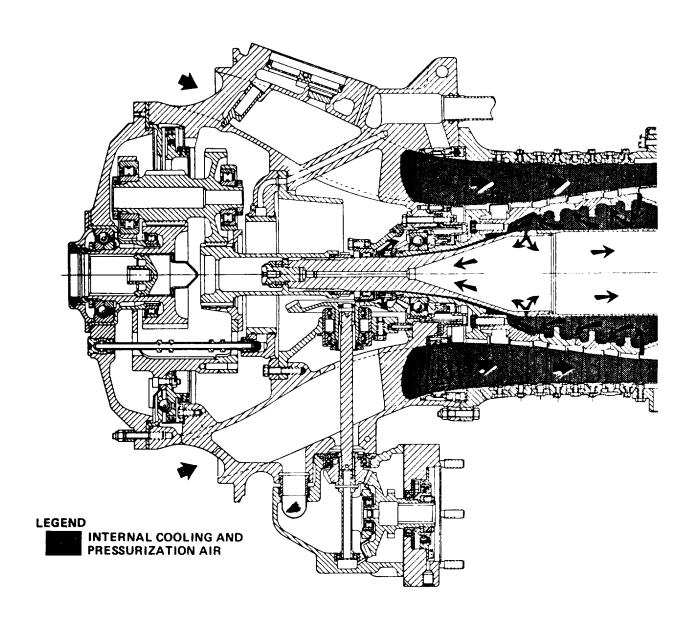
Internal Cooling and Pressurization System (T53-L-703 Engine) (Sheet 1of 2)
